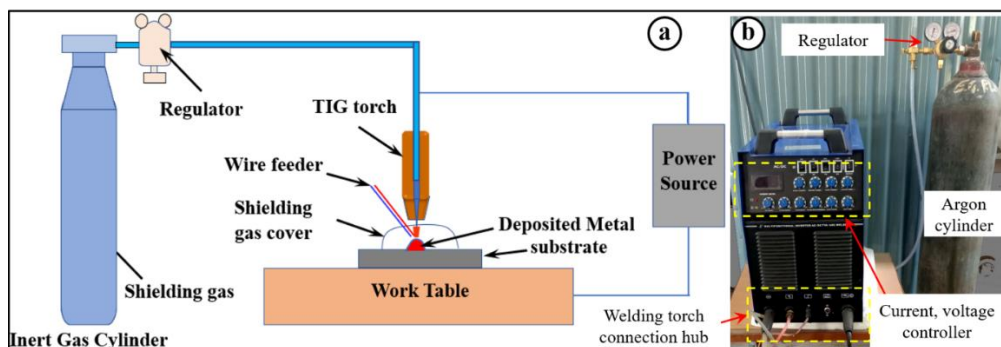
(a) schematic representation of GTAW based WAAM set up, and (b) AC/DC GTAW welding machine
